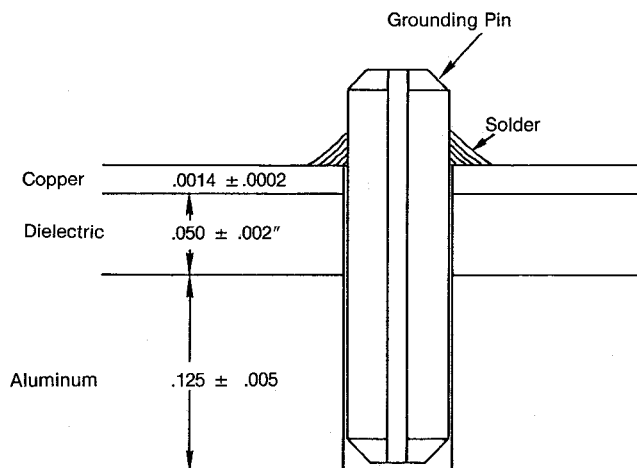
Cross-Sectional View of a Roll Pin in the Metal Clad Soft Substrate
